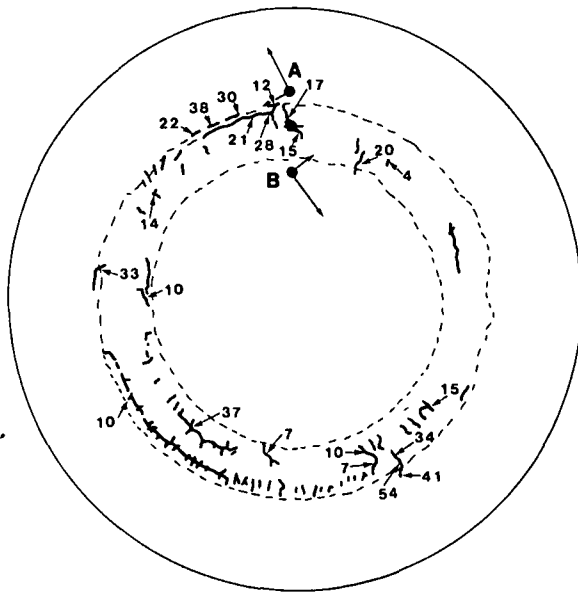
WFMP inspection of an area of the specimen welded with the worst-case welding procedure. The single circumferential crack penetrated as much as 12 mm (0.5 in) into the specimen and was easily visible with the naked eye.
